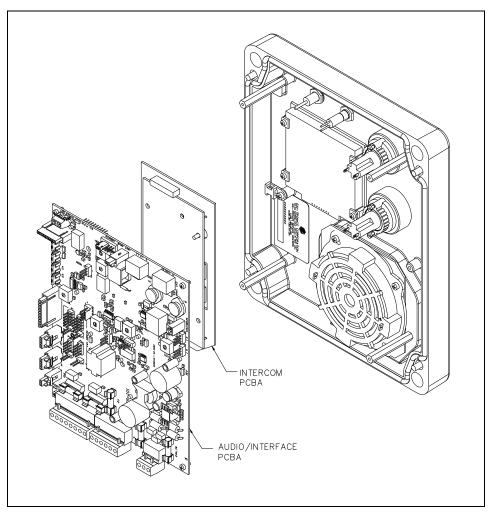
Front Panel Assembly with Intercom and Audio Interface PCBAs
